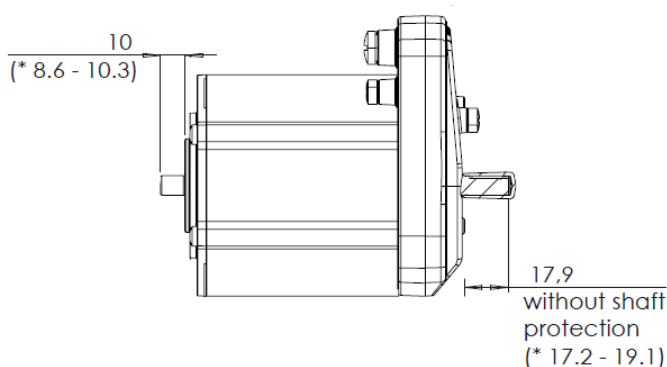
Motor shaft tolerance - SWD® Core (naked)
